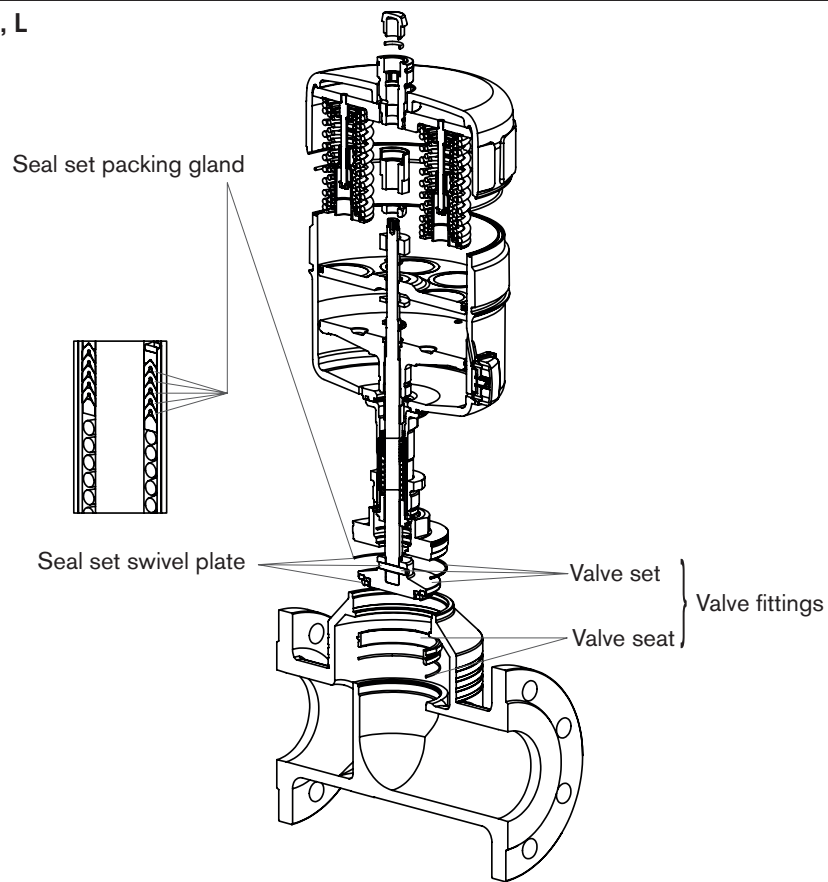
Replacement part sets Type 2012, actuator size K (175 mm), L (225 mm)
